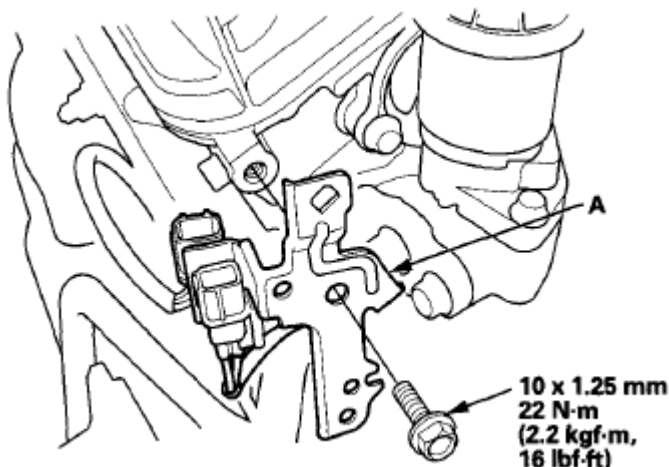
Installing Connector Bracket To Front Cylinder Head With Torque Specifications
